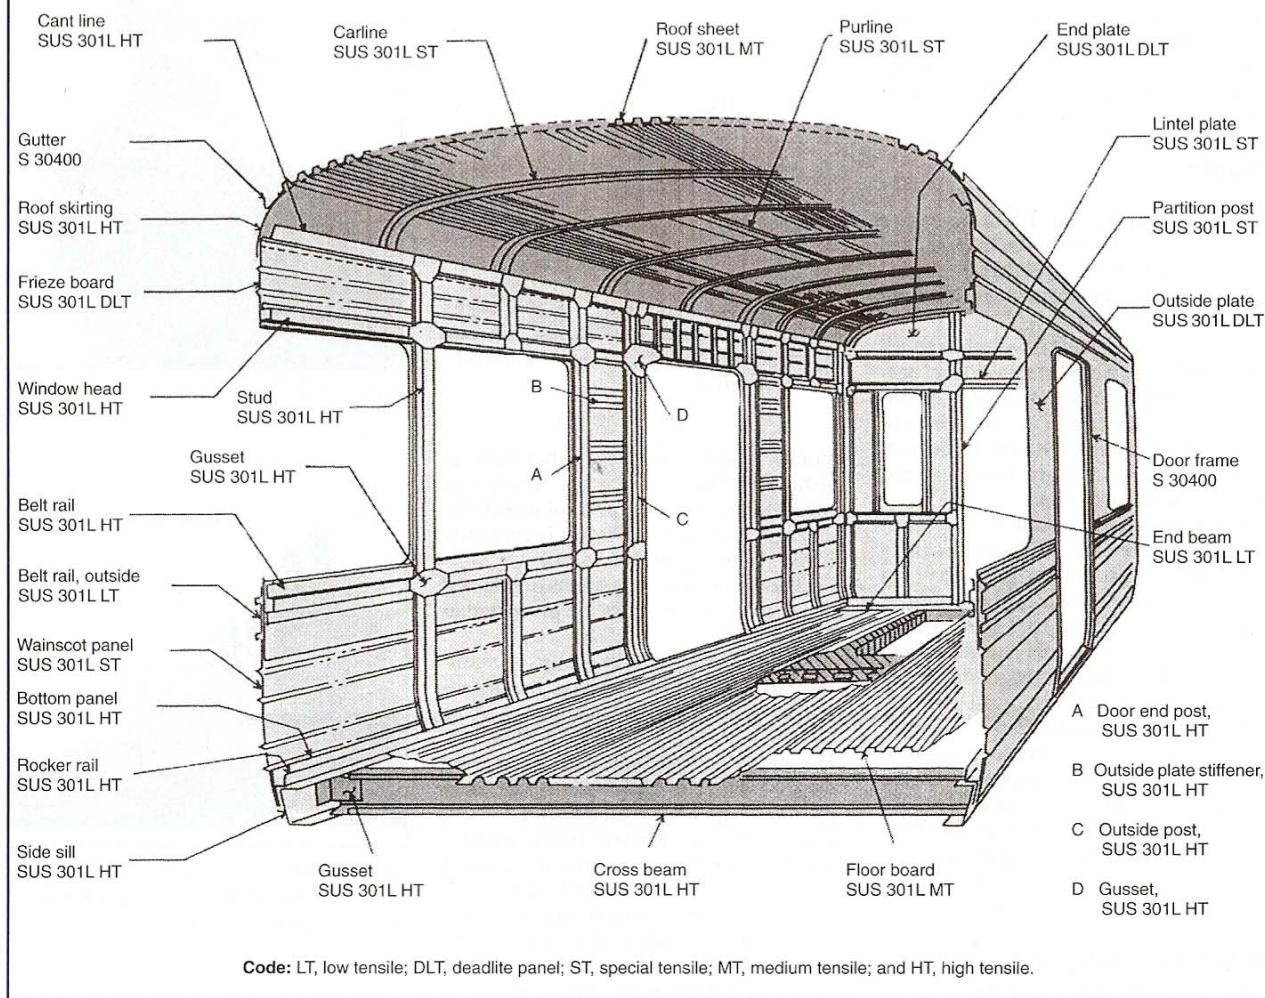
A sketch of a stainless steel railcar detailing its key components. (Photo courtesy of the Nickel Institute.)
